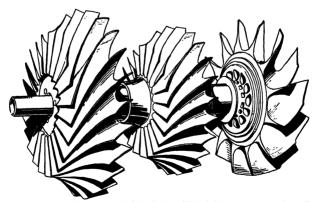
Rotor assembly of unit in Fig. 9-41. Mixed-flow compressor impellers at left, Birman-wheel rotor of turbine at right. Note the cooling-air passage entries at the hub.
